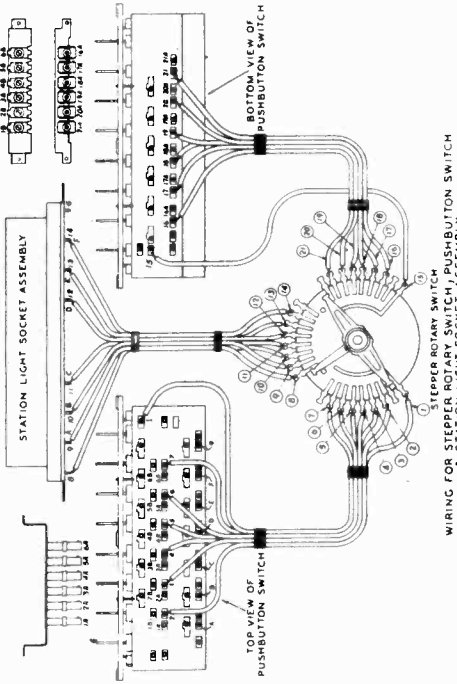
CABLE WIRING FROM STEPPER ROTARY SWITCH TO PUSH-BUTTON SWITCH AND STATION LIGHTS
